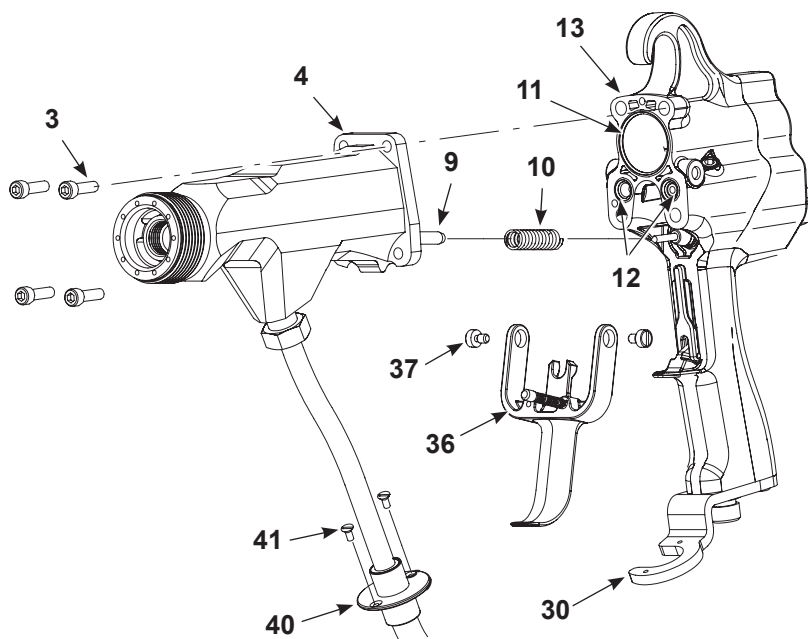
Packing Cartridge Replacement - Removing the Extension
